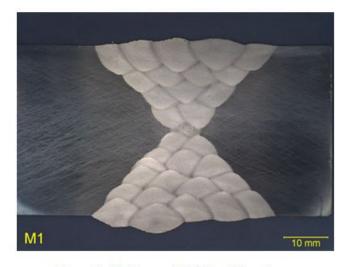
Multi-pass GMAW weld made on 1.5-in thick magnesium
